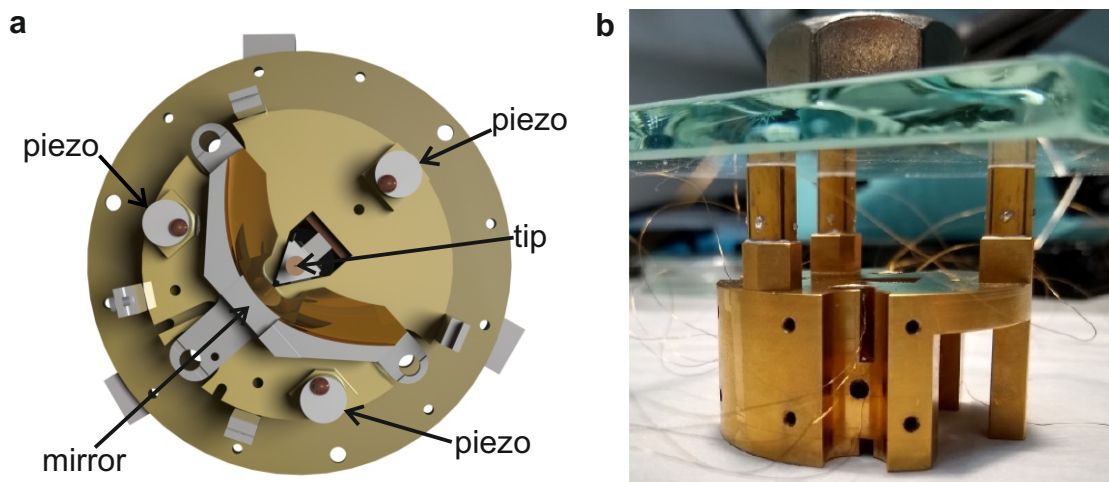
Construction of the sample Besocke scanner. a, Rendered image of a top view the scan head without ramp ring. The piezo tubes are mounted at the edge of the scan head, supporting the ramp ring carrying the sample. b, Gluing the piezo tubes to the scan head body. A glass plate is positioned on top of the piezos to add weight in order to ensure proper adhesion to the glue. Image adapted from [189]
